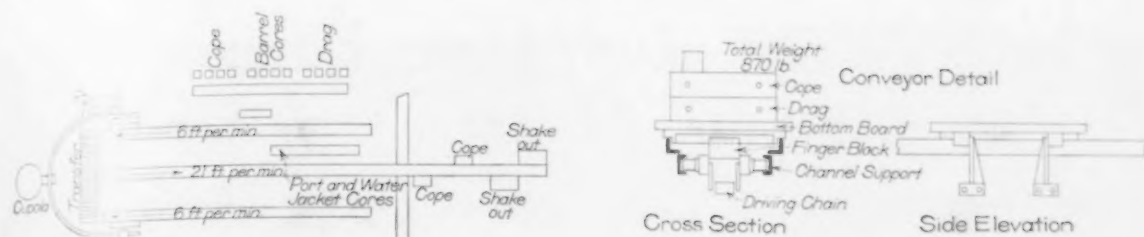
At Left Is a Diagram of the Continuous Molding Plant and at the Right the Details of the Conveyor
